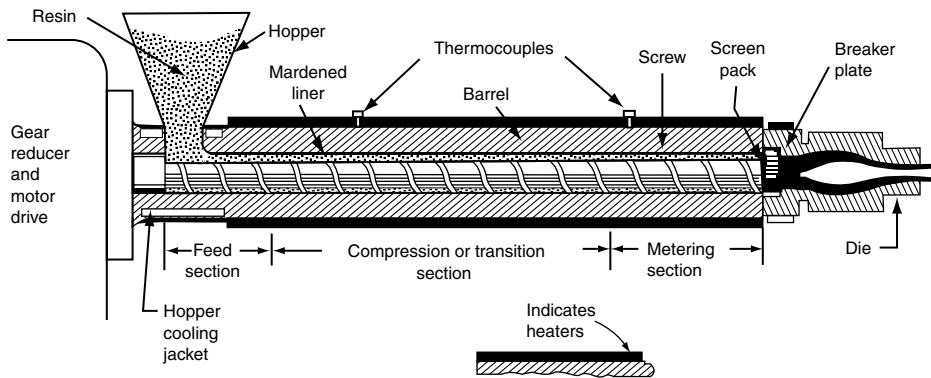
Scheme for a typical single-screw extruder showing extruding pipe.
